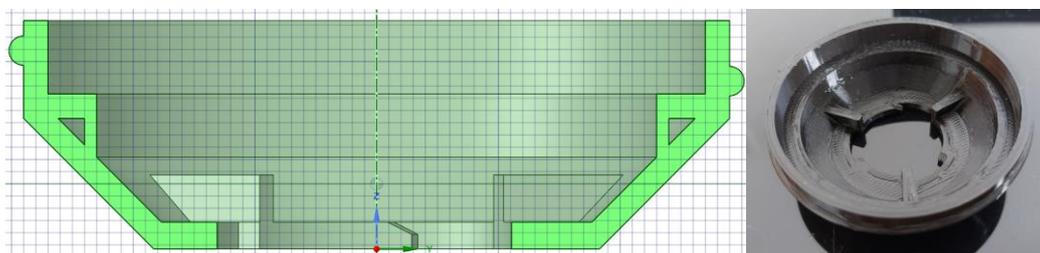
Lateral adapter version V3. Left scheme is design and the right is after 3D printing.
